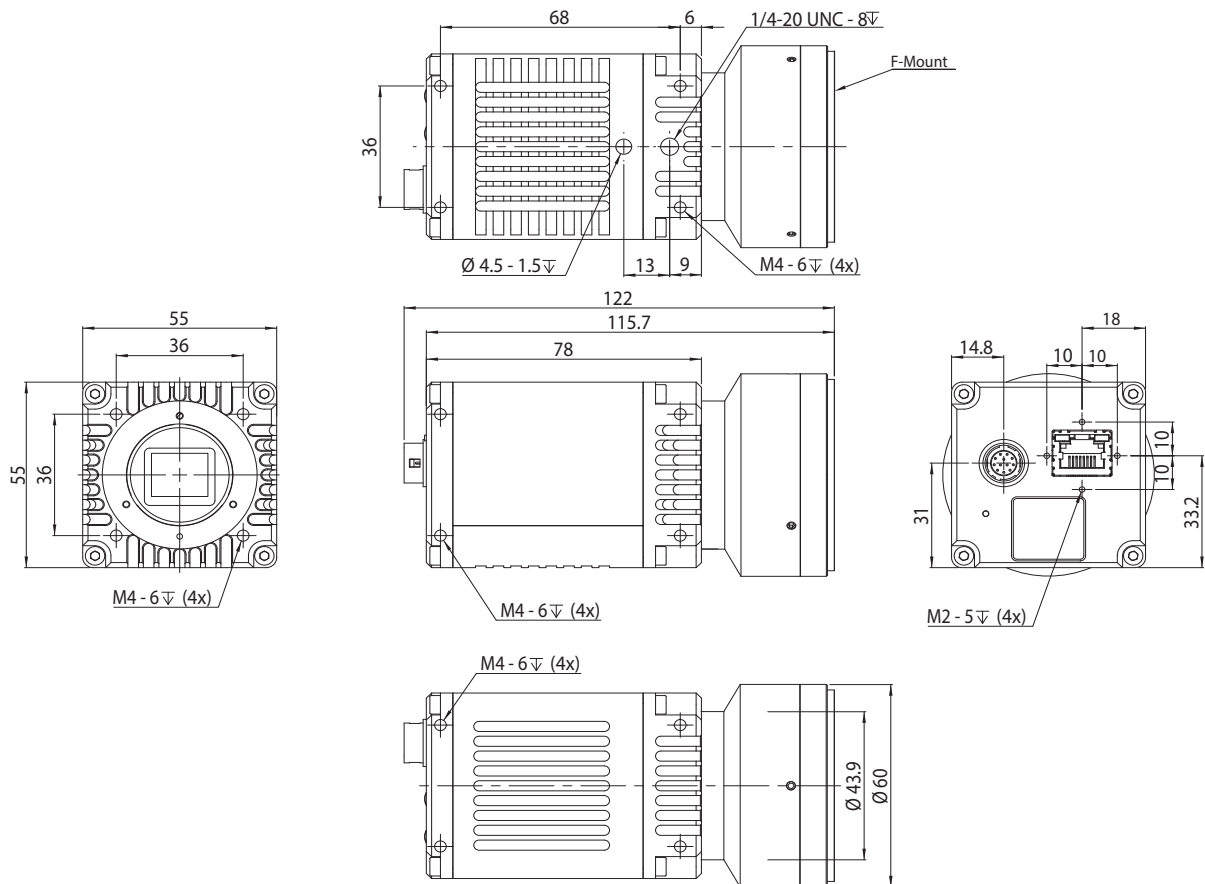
Dimensions Goldeye G-032 SWIR with F-Mount lens adapter
